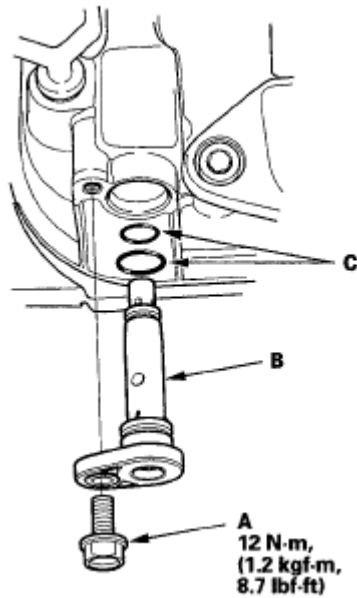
Identifying PCV Valve And Bolt With Torque Specifications
